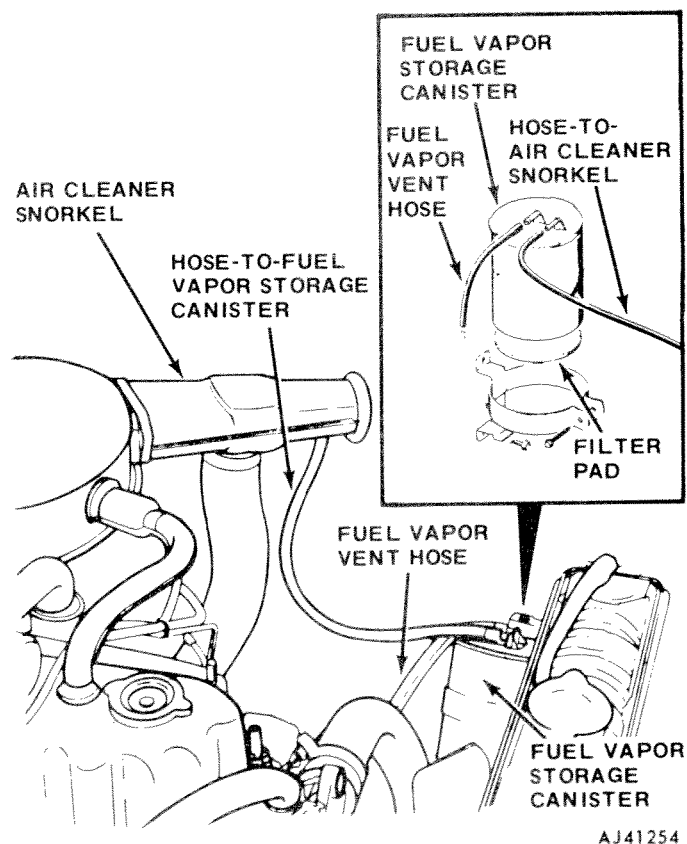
A-17 Fuel Vapor Storage Canister (Six-Cylinder Shown)
